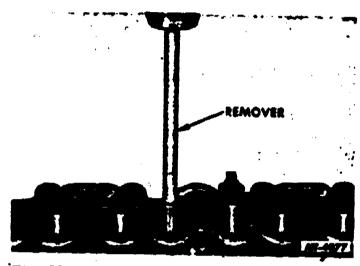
Removing Valve Guide With SE-1722 Remover Tool.
